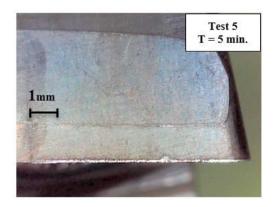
Uniform flank wear of the tool after 5 min. milling for trochoidal tests.
